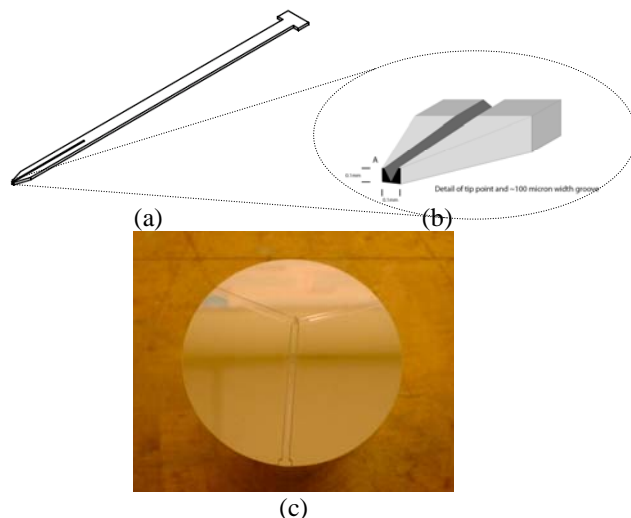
(a) Printing tip design close up; (b) view of the tip; and (c) the mold insert for injection molding process.
